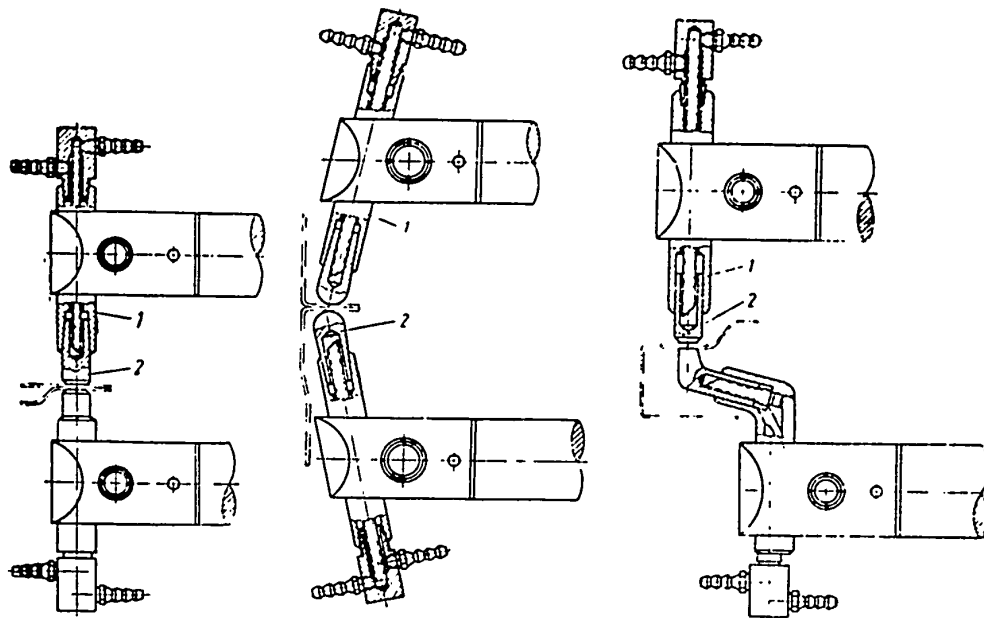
Operating Tools of Spot-Welding Machines
